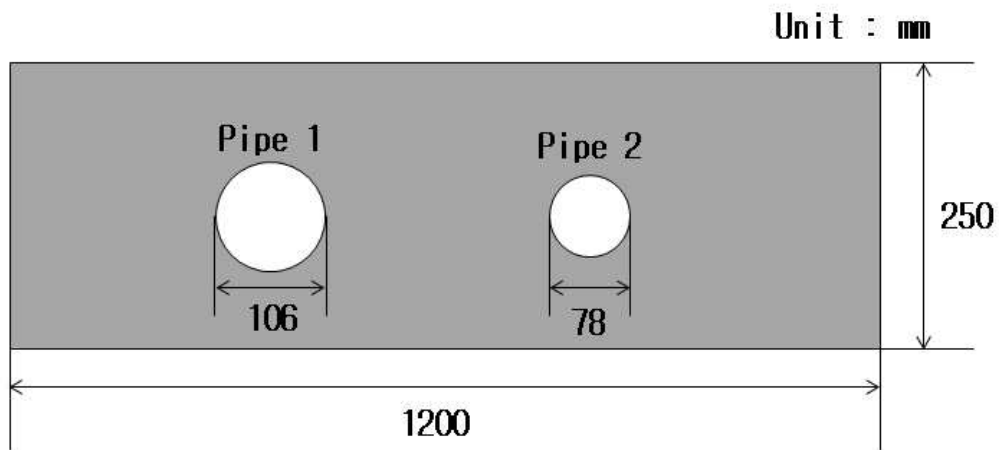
Detail modeling of welding connection between cryogenic steel plate and STS pipe
